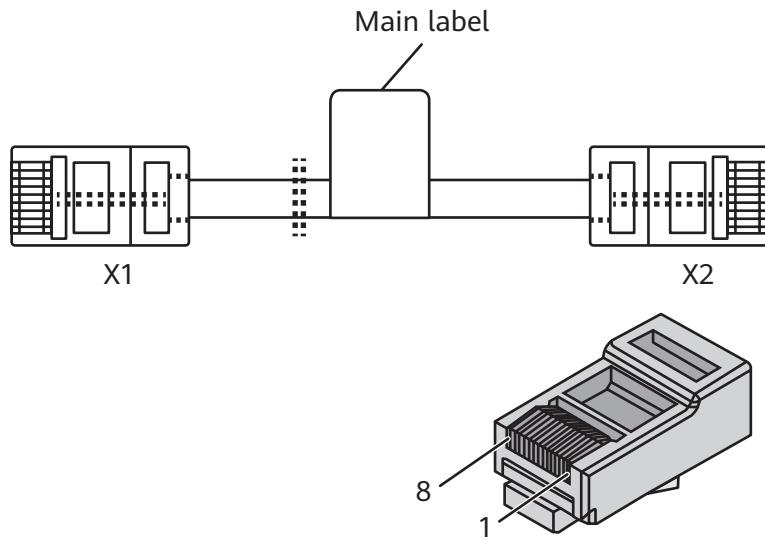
(#) shows the appearance of an Ethernet cable.
